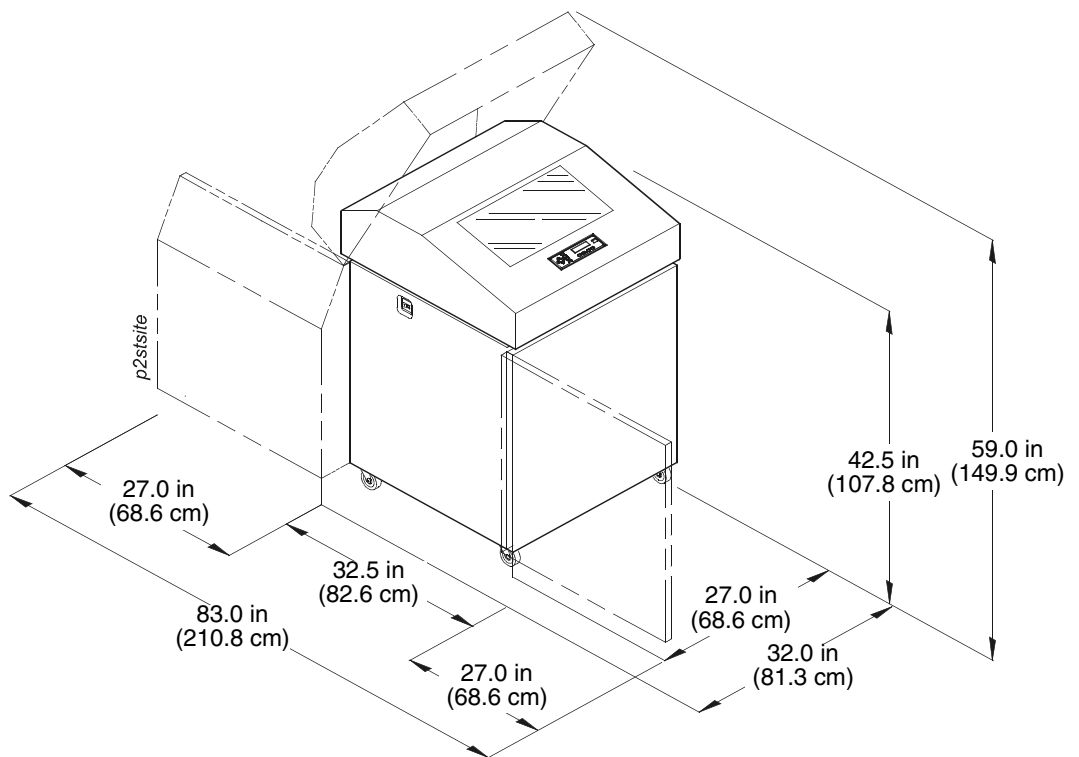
Printer Dimensions - Cabinet Model with Paper Stacker
